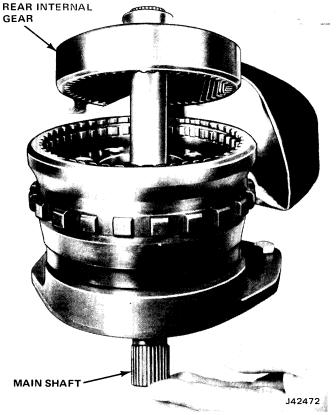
Removing Rear Internal Gear and Main Shaft from Output Carrier
